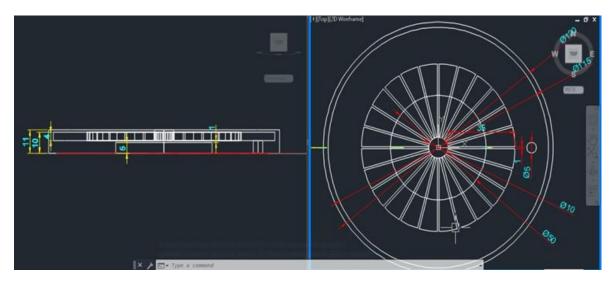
2D drawing of Circular inlet radial micro Channel (Front View and Top view)
